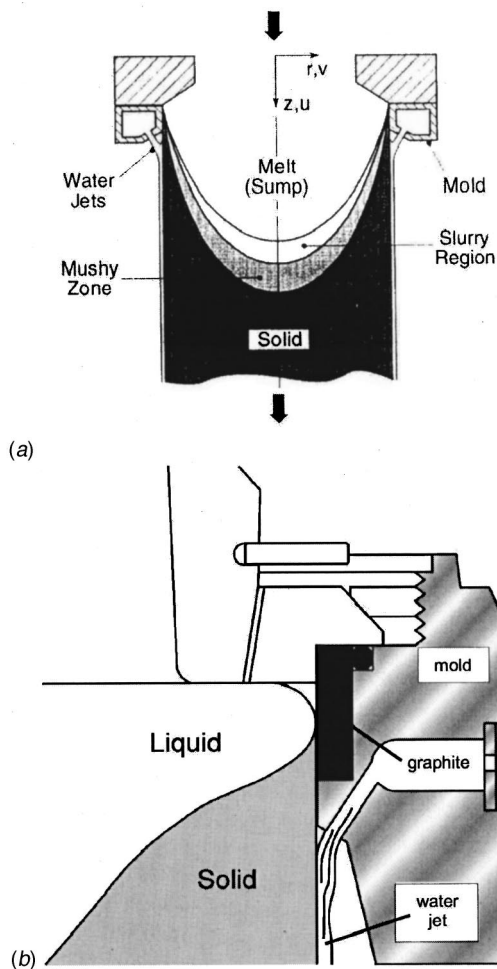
(a) Schematic of generic DC casting process; (b) AirSlip™ mold cross-section
